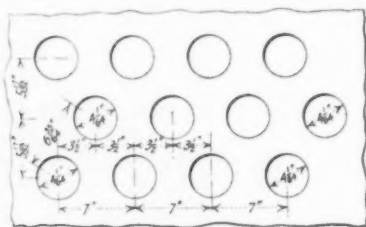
DIAGONAL SPACING OF TUBE HOLES IN STEAM DRUM
